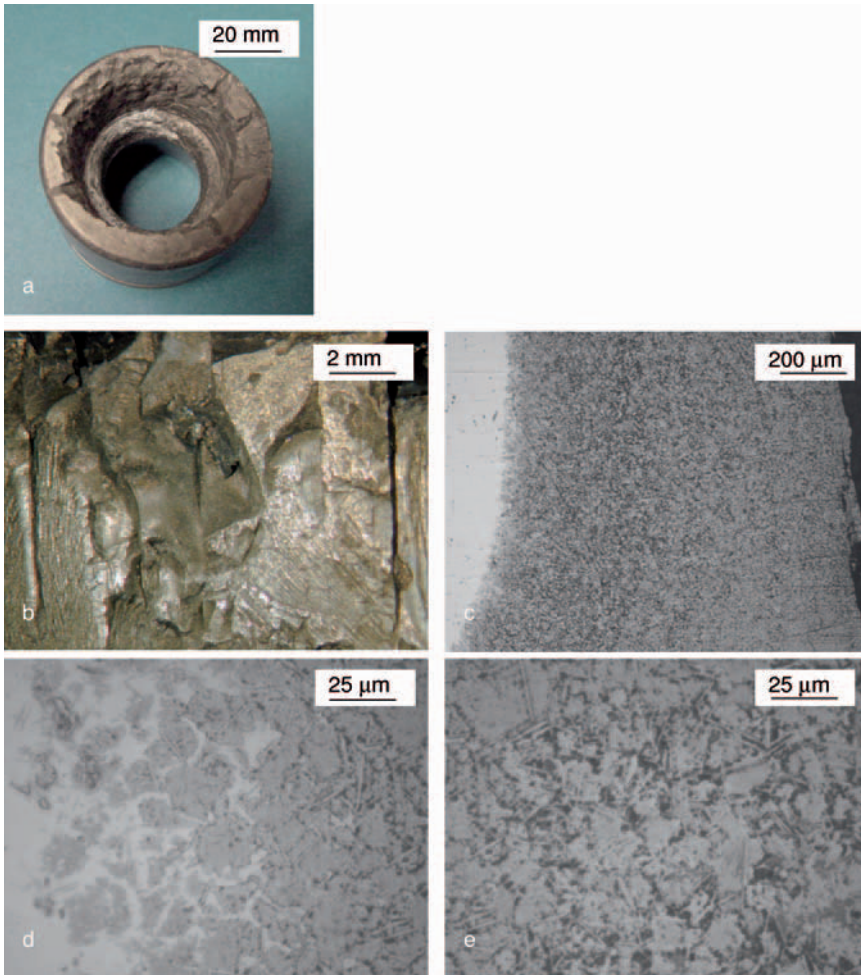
The advanced stage corrosion between molten Mg-9Al-1Zn alloy and Alloy 718 (10h, 600 °C): a bushing used as a flow channel for molten magnesium; b macro image of internal surface of the bushing; c cross section of the entire scale thickness; d magnified view of the metal-scale interface region; e magnified view, close to the outer scale surface
